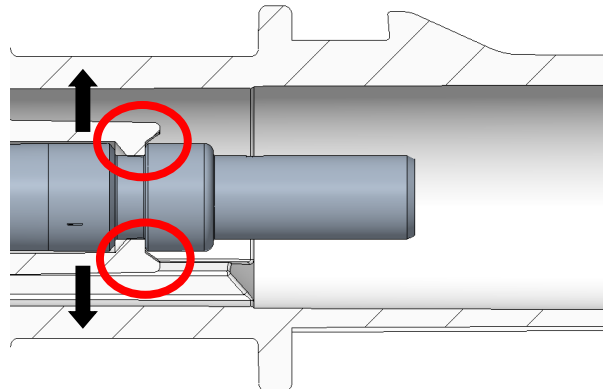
DEFLECTION OF THE PRIMARY LOCKING LATCHES
